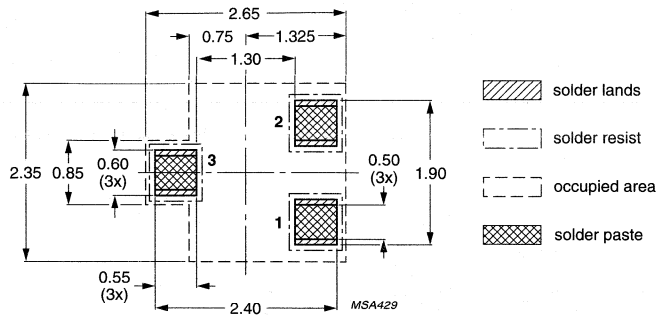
Reflow soldering footprint for SOT323 and SC70-3.
